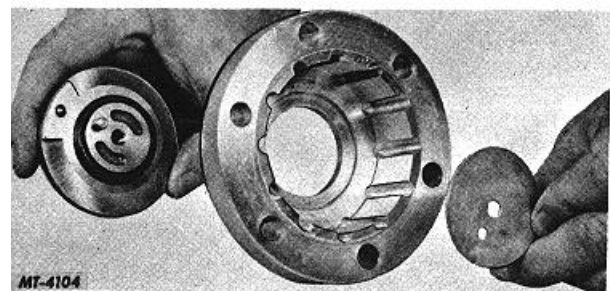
Removing Control Assembly and Disc from Clutch Body
